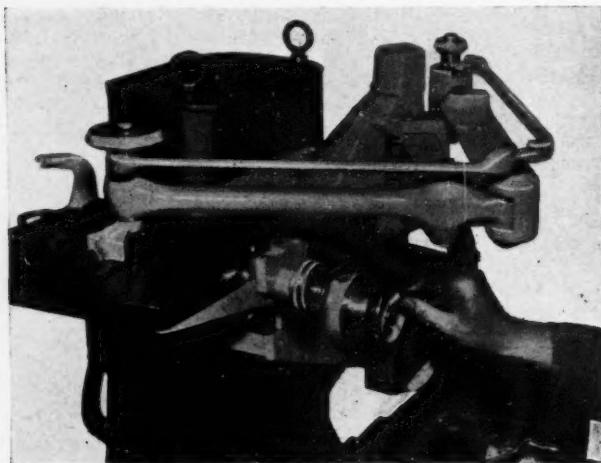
Toolmasters Type 5/1 Diaform Precision Grinding Wheel-forming Attachment
